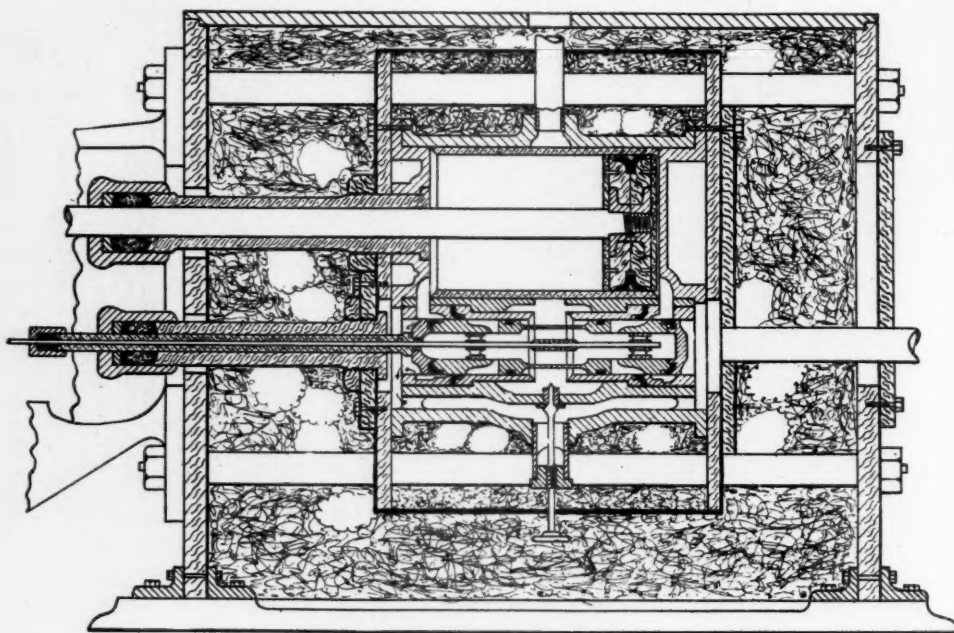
INSULATED ENGINE CYLINDER OF PLACE'S AIR-LIQUIFYING EXPANSION ENGINE.
